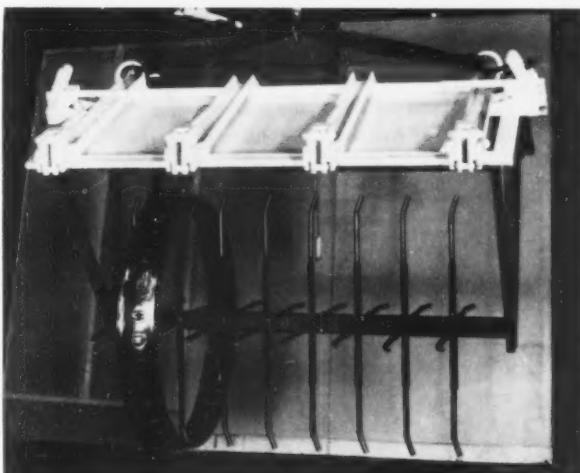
48 inch diameter jet aircraft engine support; fixture capable of loading six units.
